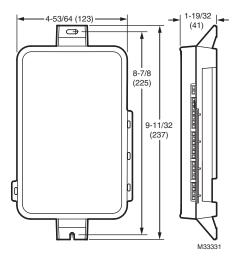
Dimensions of Equipment Interface Module in in. (mm).
